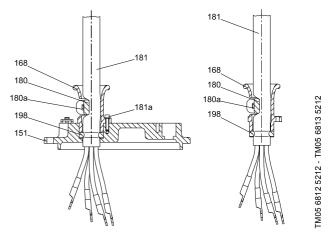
Cable entry without adapter flange attached to motor top cover (left) and cable entry (right)
